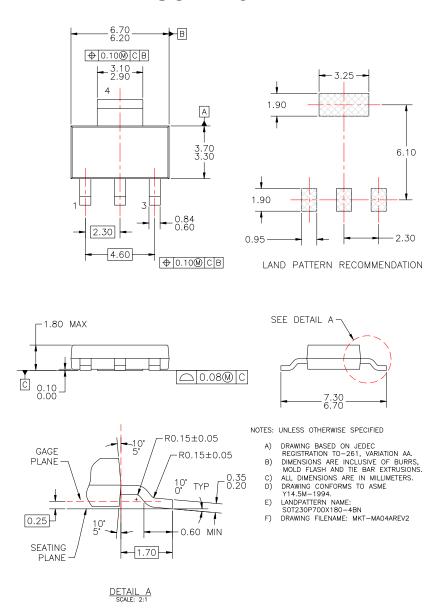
MOLDED PACKAGE, SOT-223, 4-LEAD
